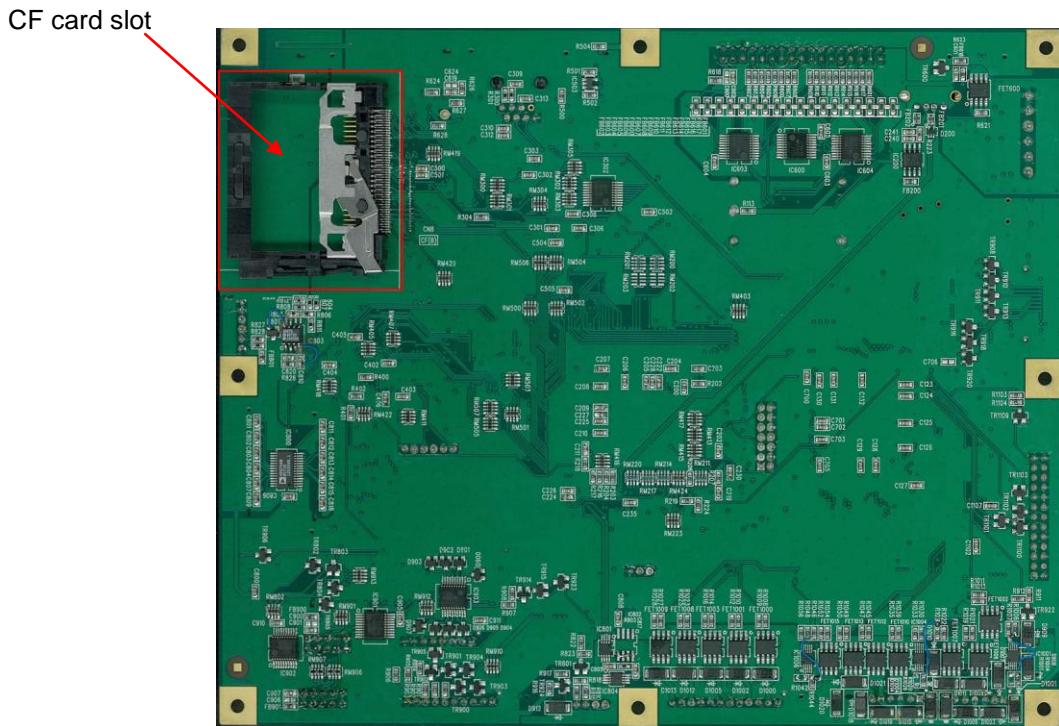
Overview of CPU Board Layout (Soldered Side)
